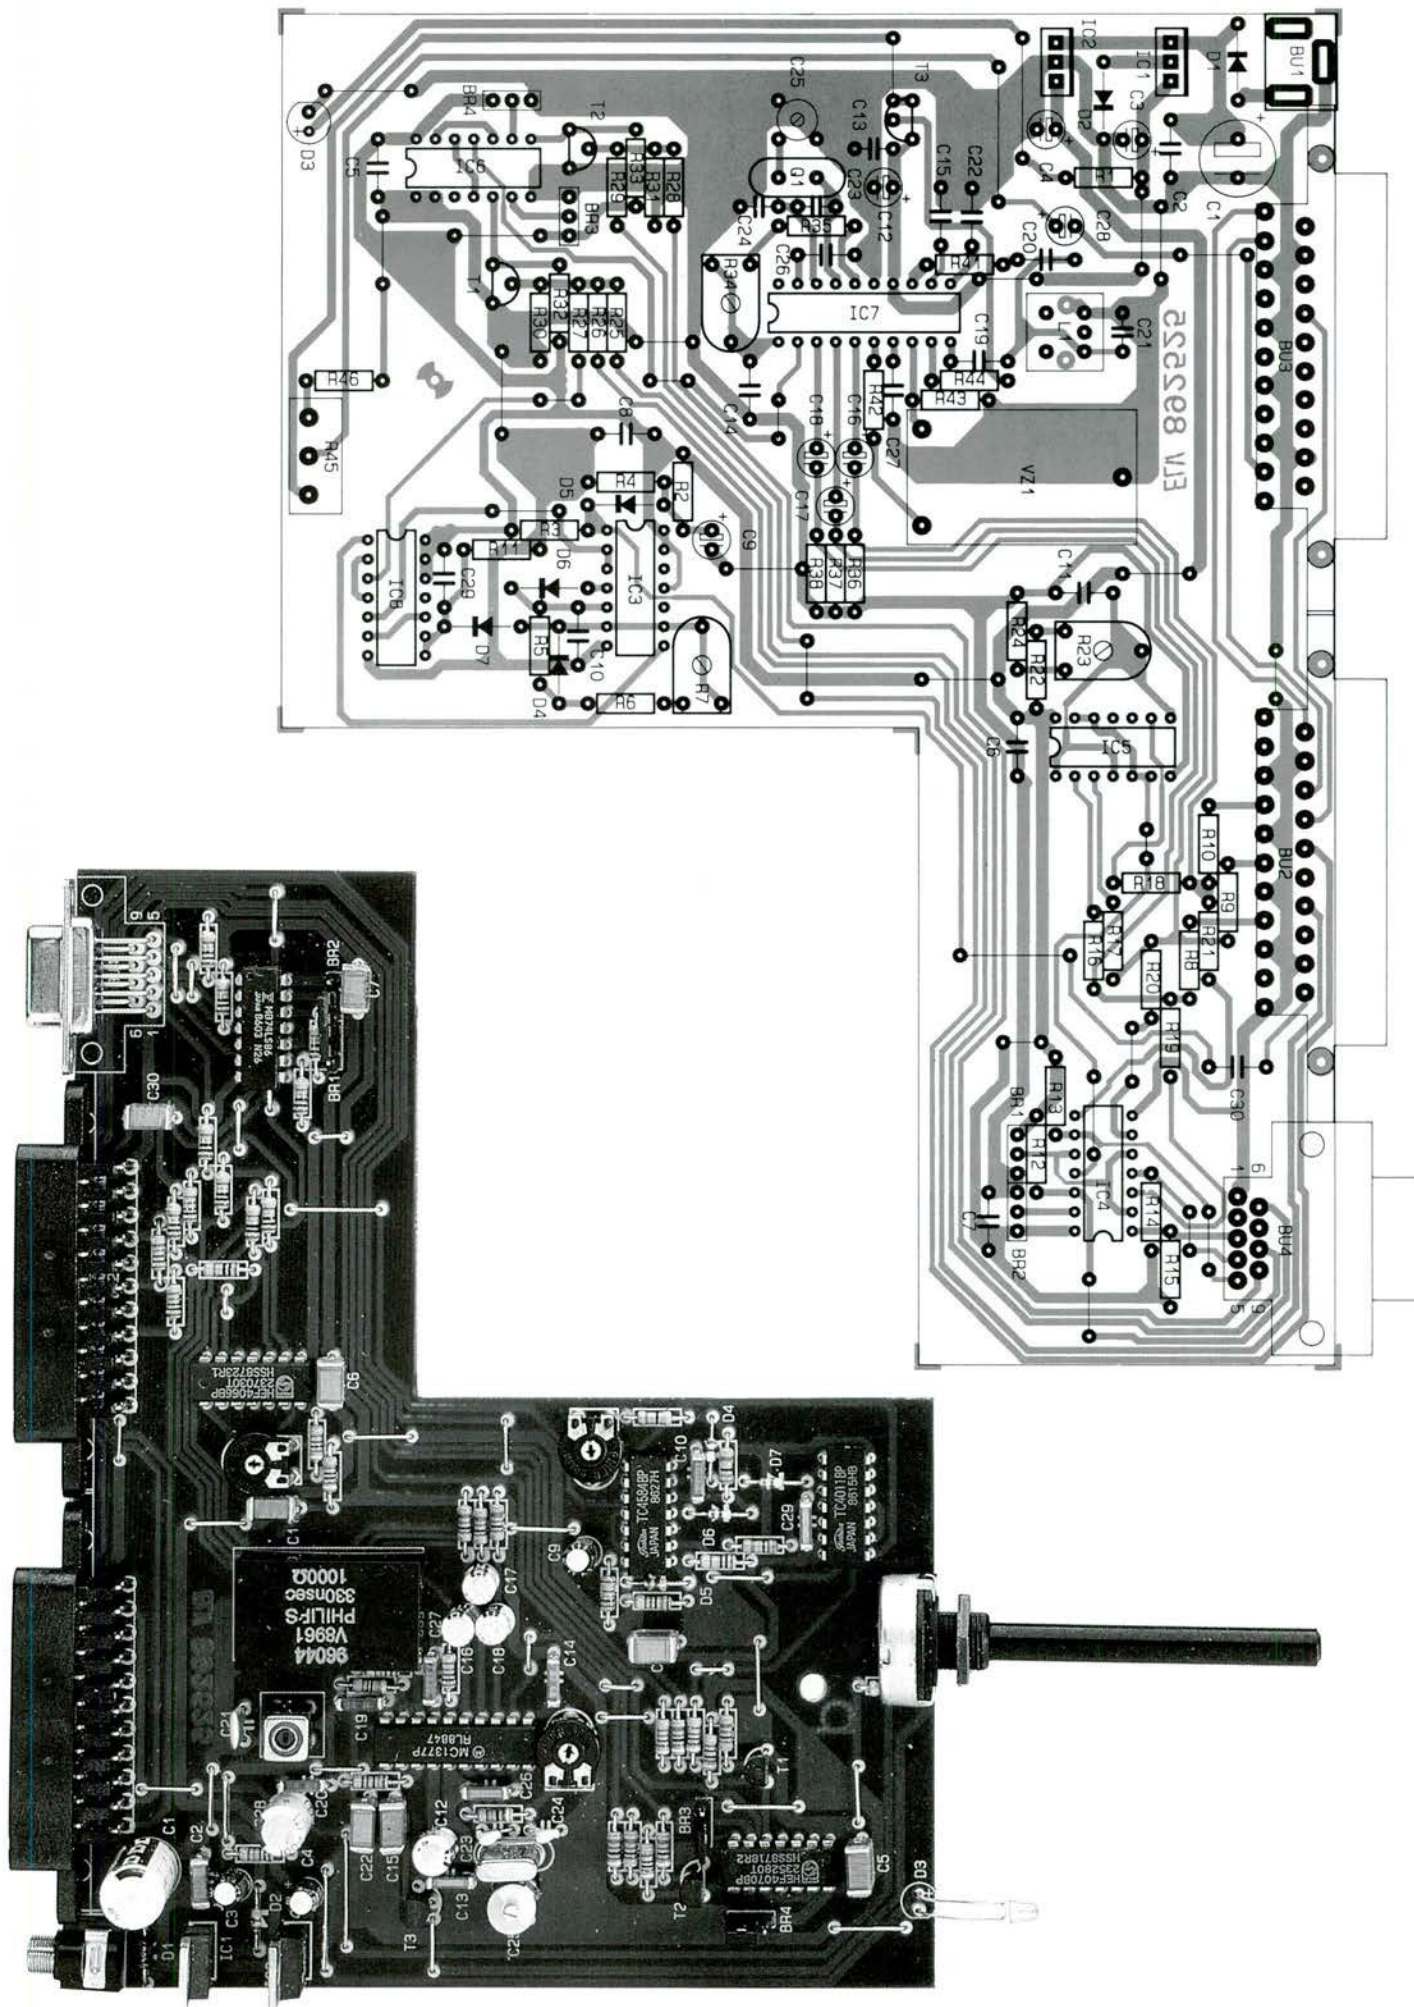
Component mounting plan and top view of the printed-circuit board for the RGB-to-CVBS converter.
